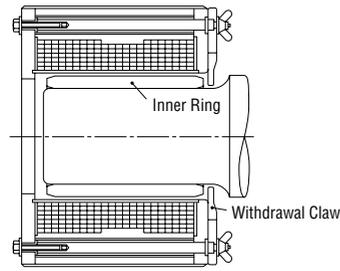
Removal of Inner Ring Using Induction Heater
